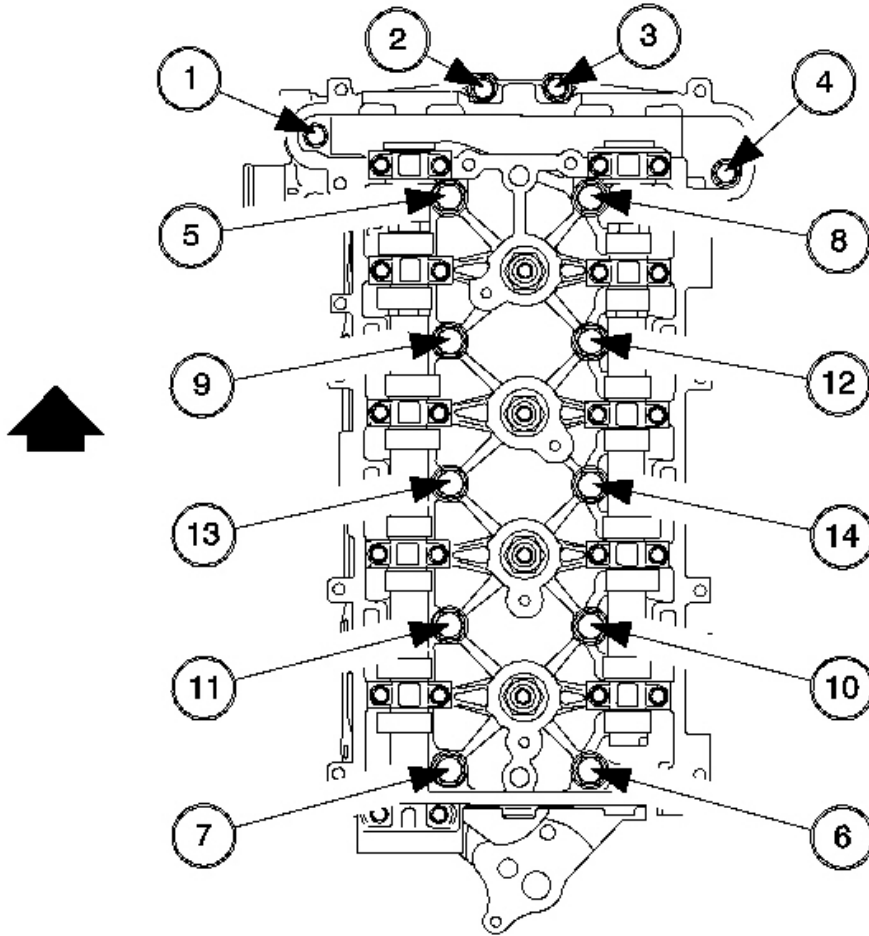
Removing Cylinder Head Bolts Using Loosening Sequence
